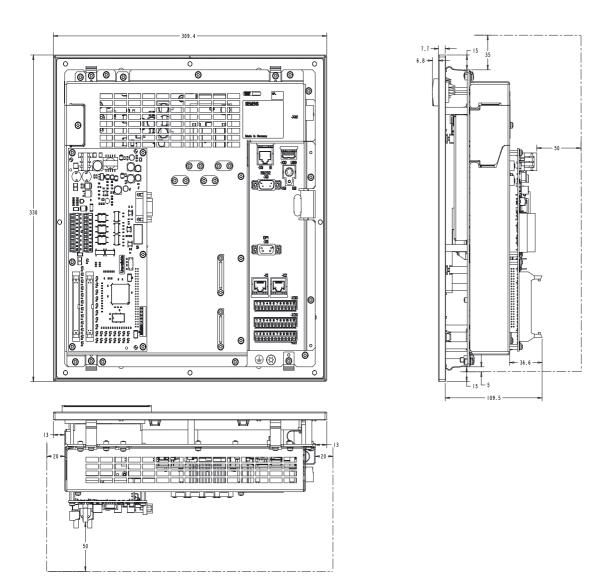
Dimensional drawing CNC operator panel with MCPA module
